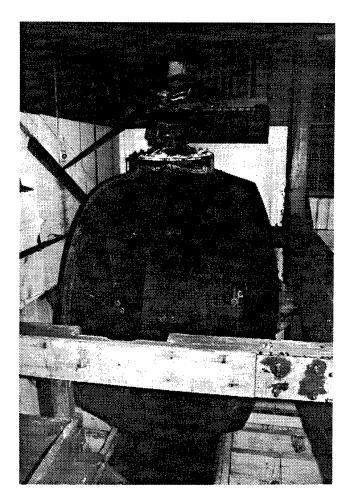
Building 1800-1: Glazing barrel or "Sweetie" barrel.
